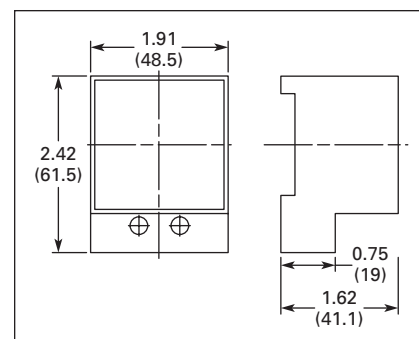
DIN Rail Adapter — Approximate Dimensions in Inches (mm)
